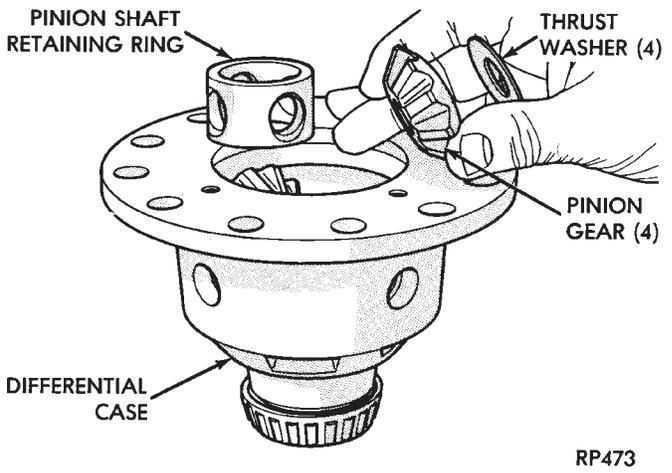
Remove or Install 4 Pinion Gears and 2 Side Gears
